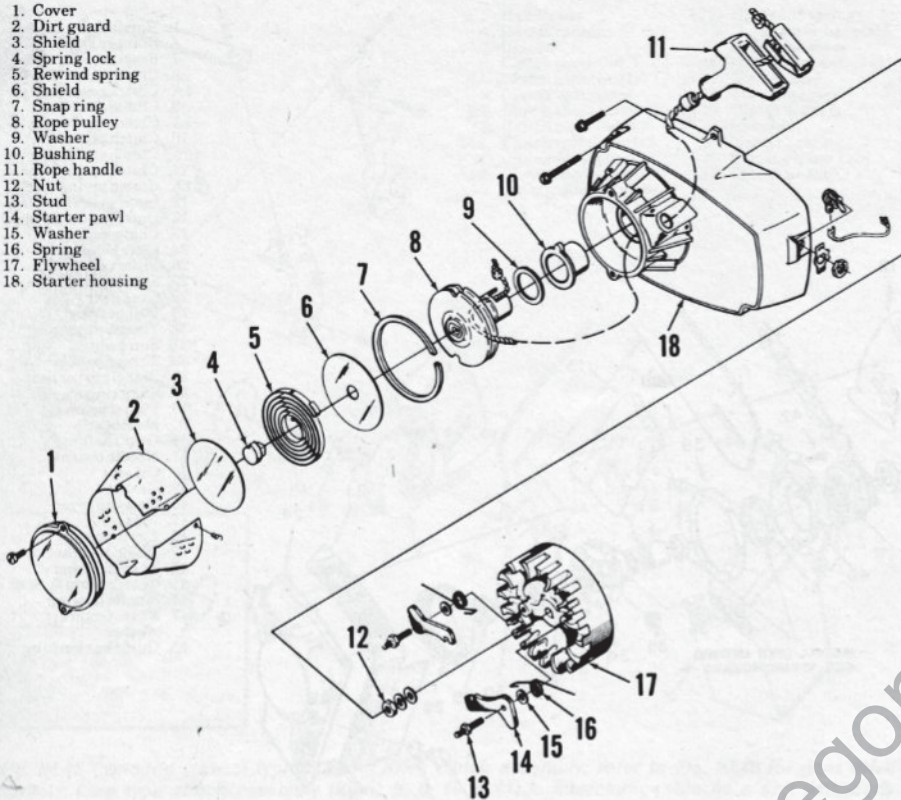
Exploded view of recoil starter used on model XL-400 Automatic.
